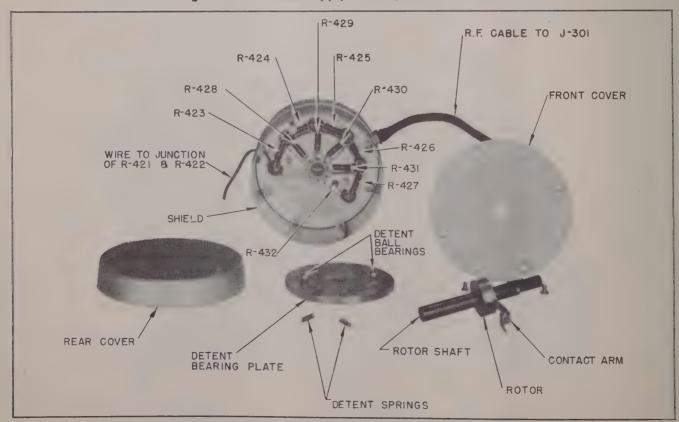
Step Attenuator, Rear View, Cover Removed
